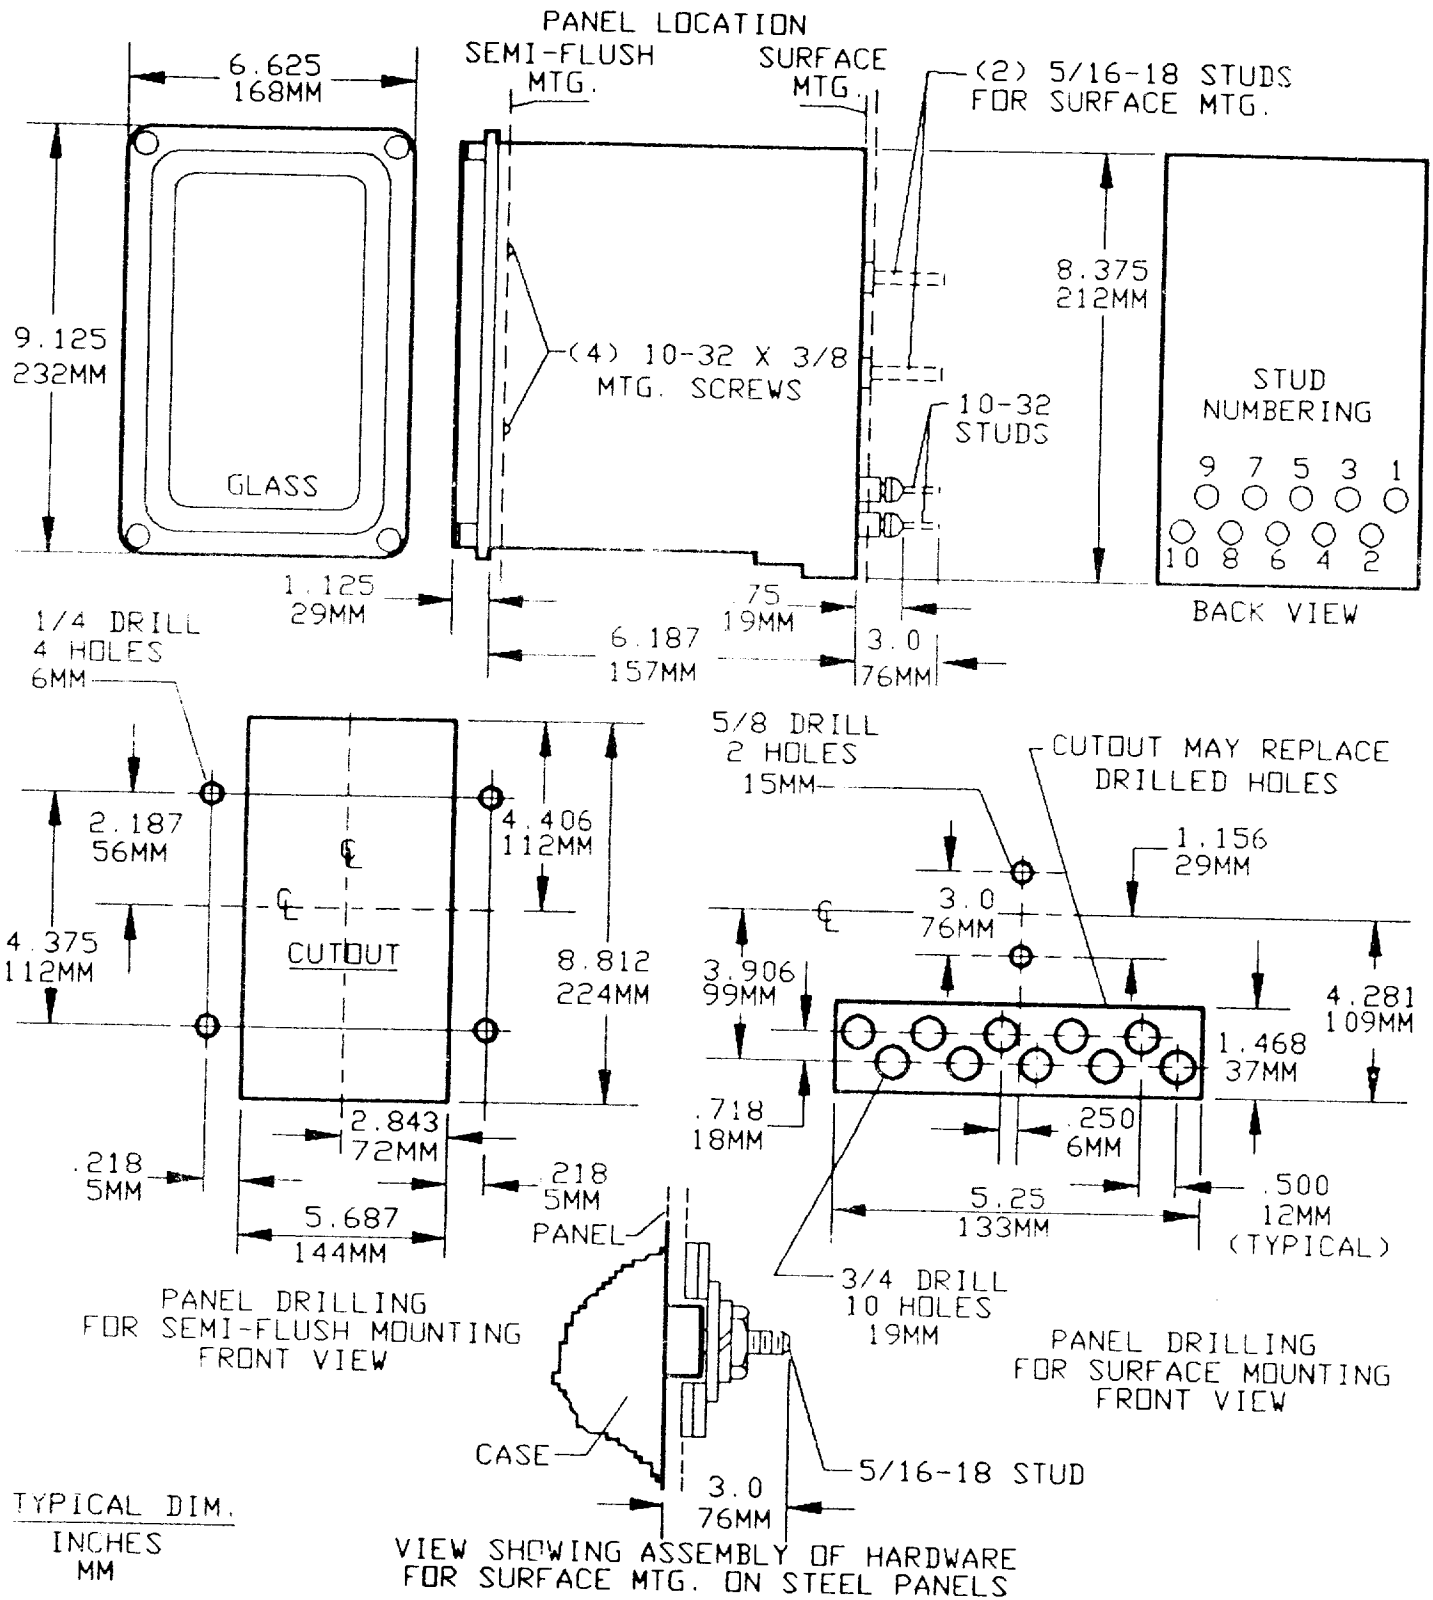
(6209271 [8]) Outline and Panel Drilling Dimensions for the STVIIA Relay.
